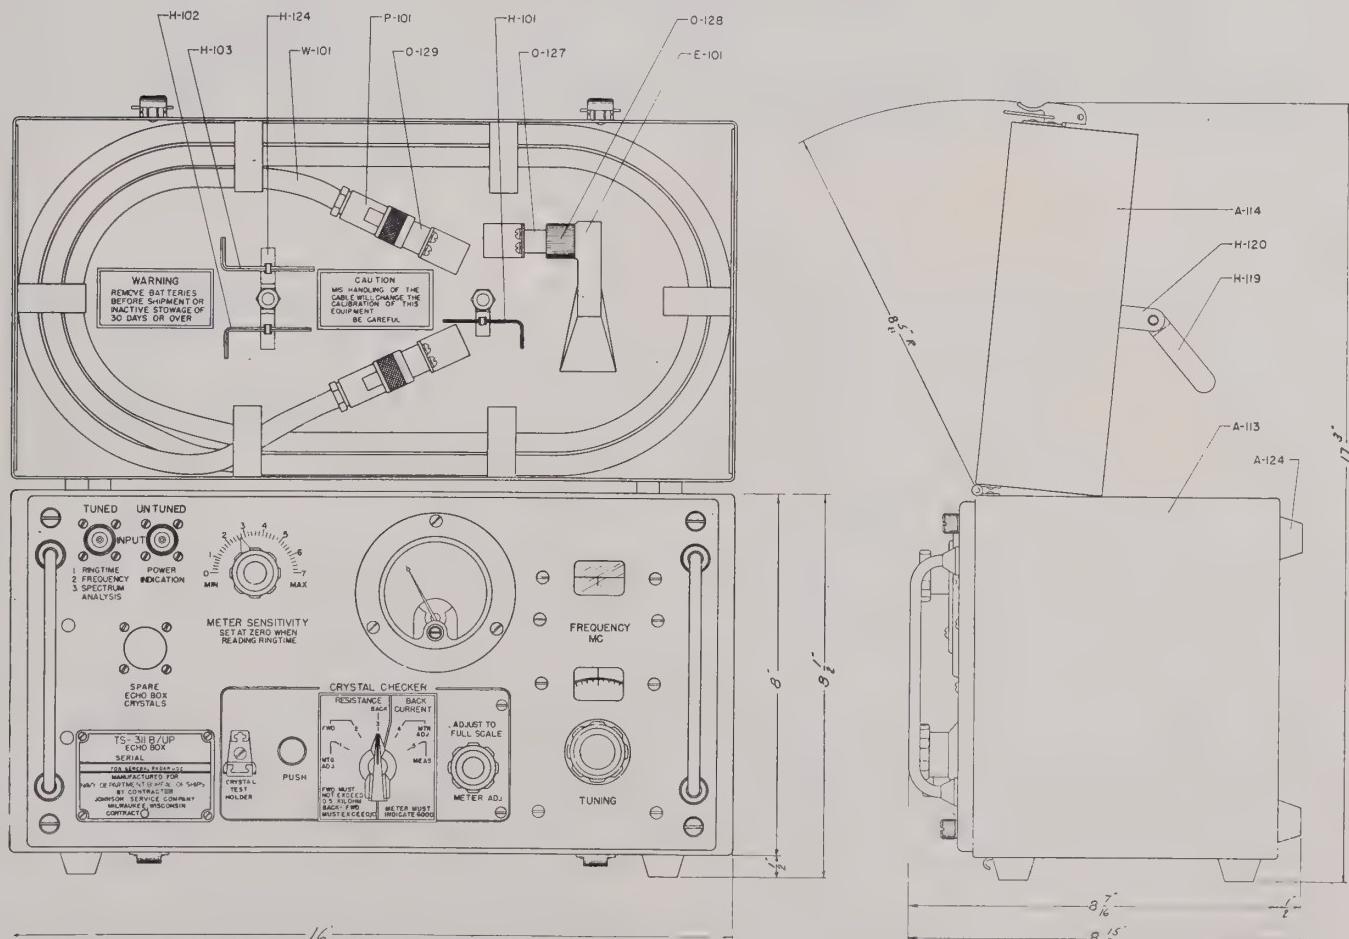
Outline and Dimensional Drawing of Echo Box TS-311B/UP
